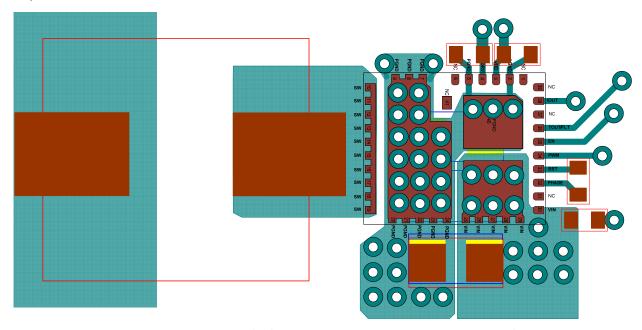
Example of PCB Layout (Placement and Top Layer PCB)
